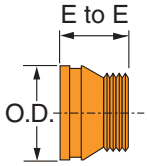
CONCENTRIC REDUCER GROOVE BY THREAD
